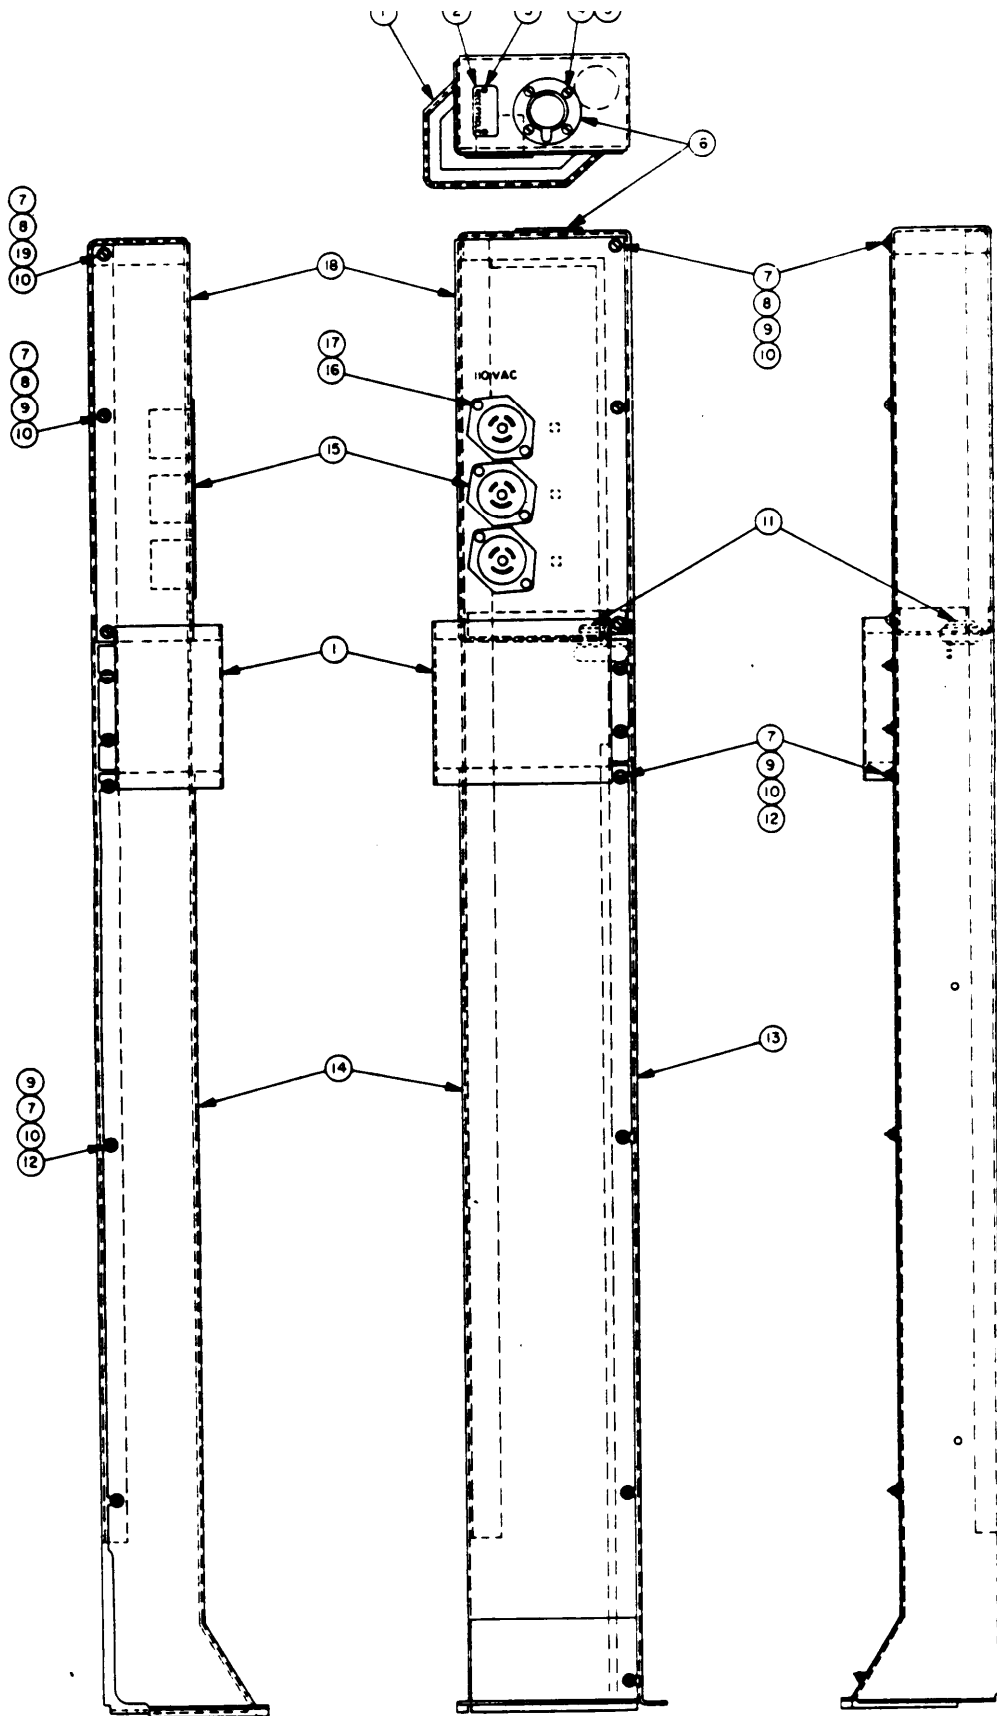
Duct Assembly, Electrical (Sheet 1 of 2)
